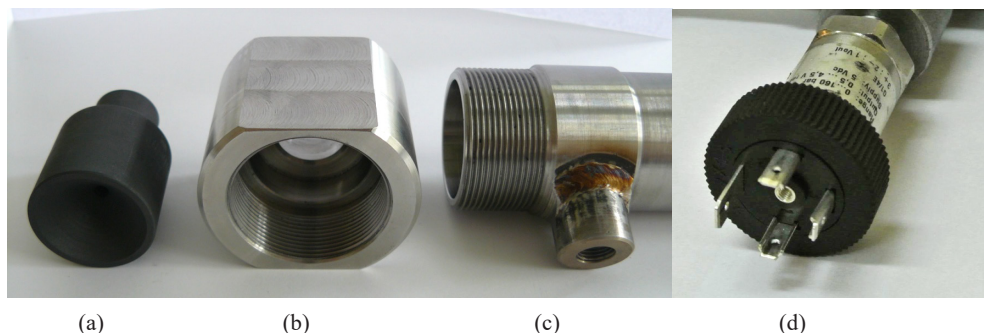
View of a part of the laboratory motor for testing propellants: (a) ejector nozzle, (b) motor head in which the nozzle is placed, threaded end part of the body allowing for retightening the head, (c) measurement probe for mounting the pressure transducer, (d) piezoresistive pressure sensor
